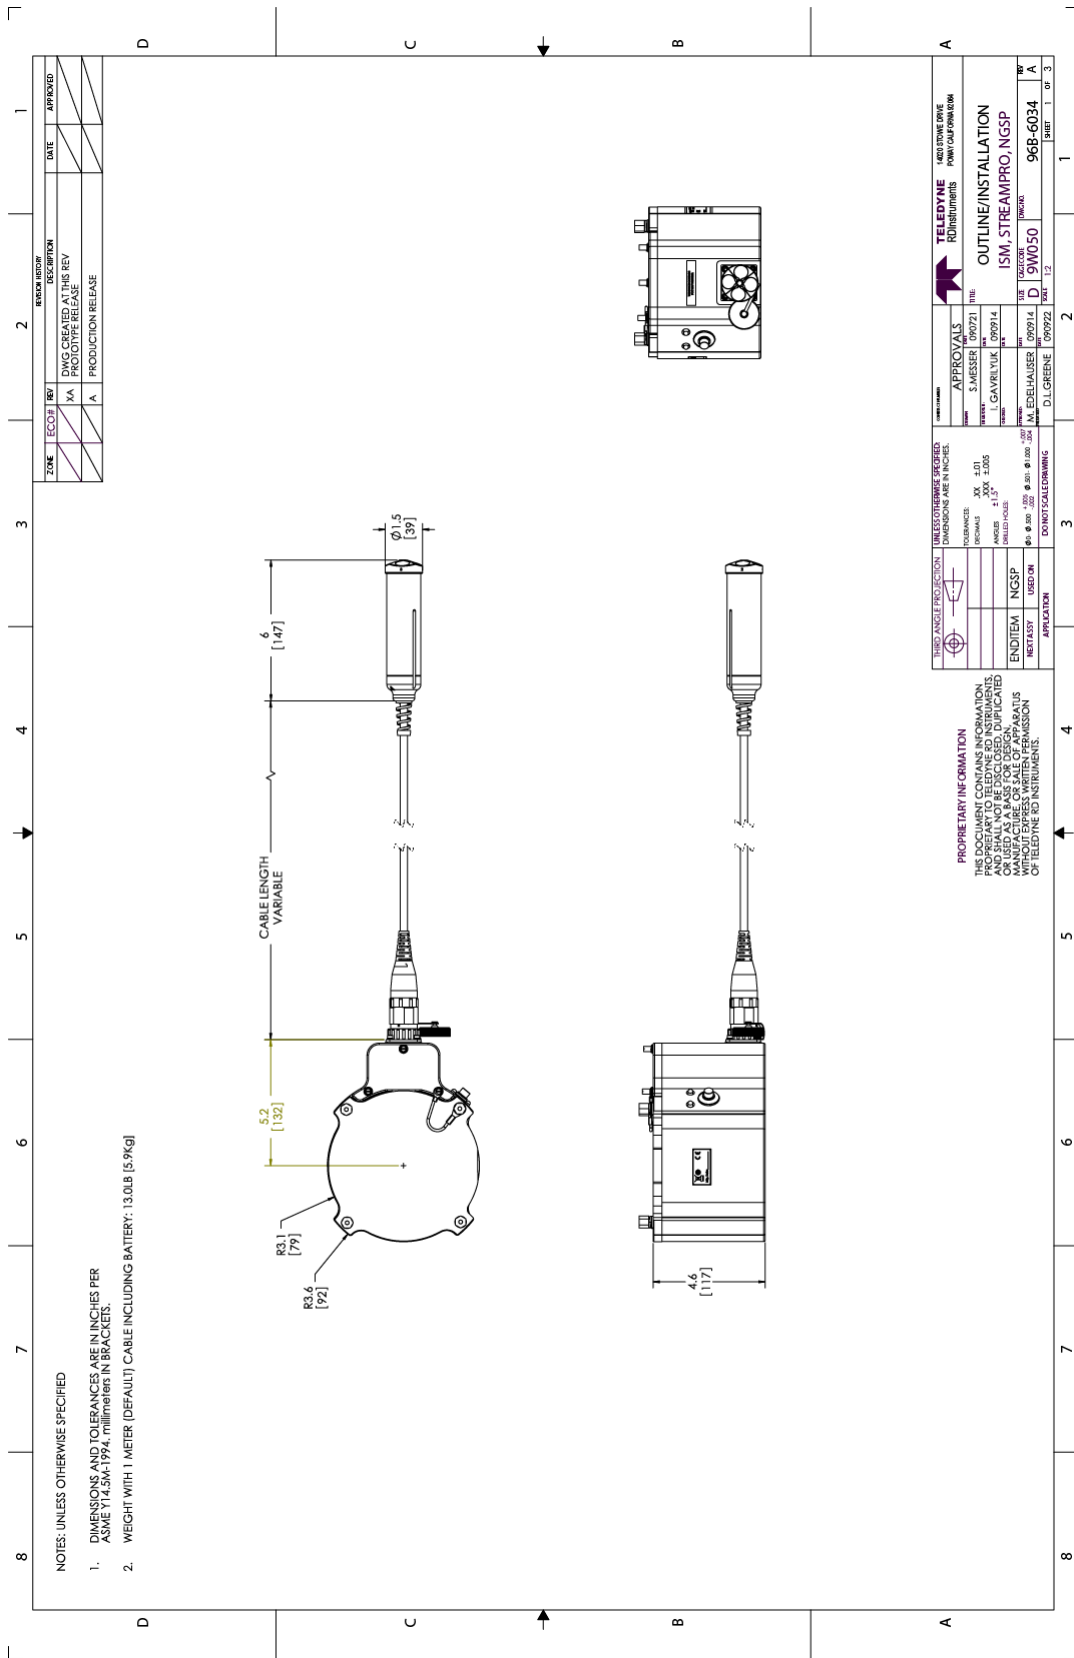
Outline Installation Drawing 96B-6034 – Sheet 1 of 3
